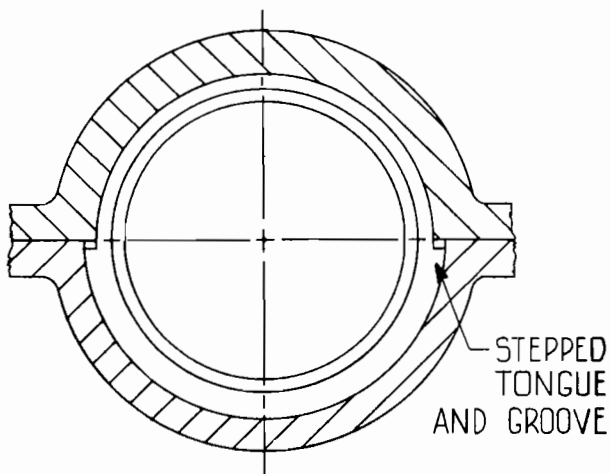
Installation of Case Wear Rings—"Floating" Design.
